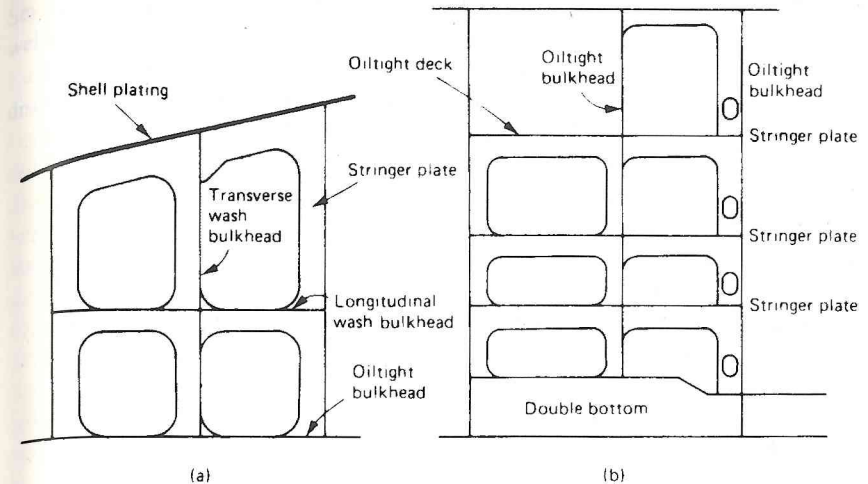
Deep tank: (a) plan view; (b) elevation looking outboard
